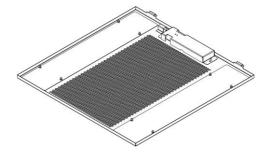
Installation of Outlet Vent Cover Plates on Face Plate
